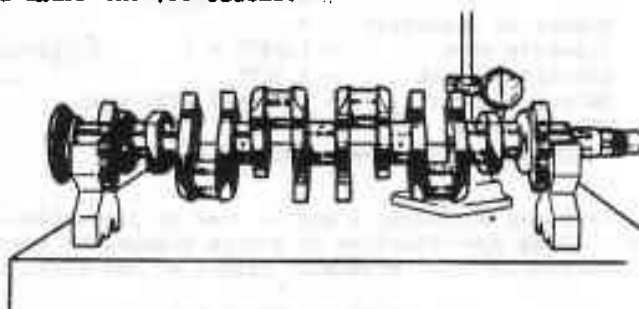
CHECKING PARALLELISM OF SHAFT AND TABLE.
